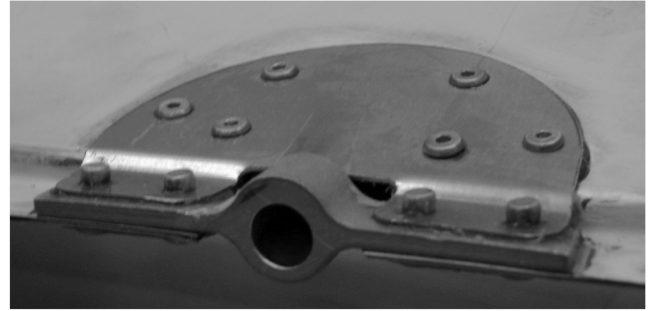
Bearing block for the canted tab axle at the aileron trailing edge.
